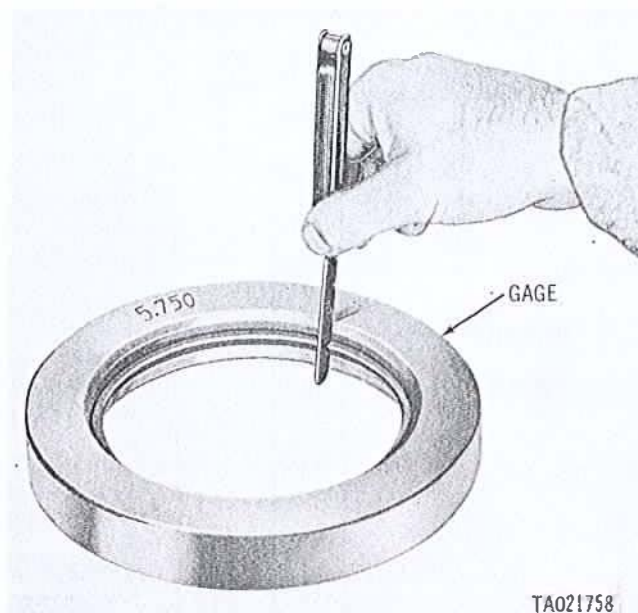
Measuring piston ring end gap using piston ring gage.
